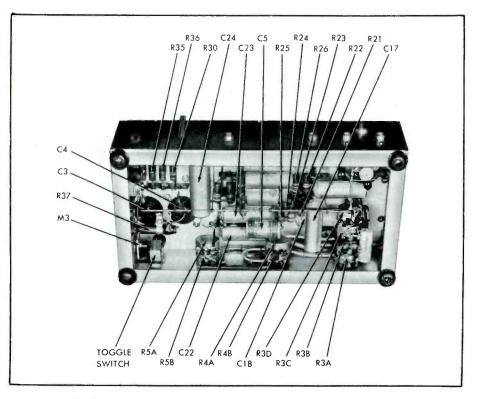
Bottom View Showing Parts Located in Front Part of Chassis.
